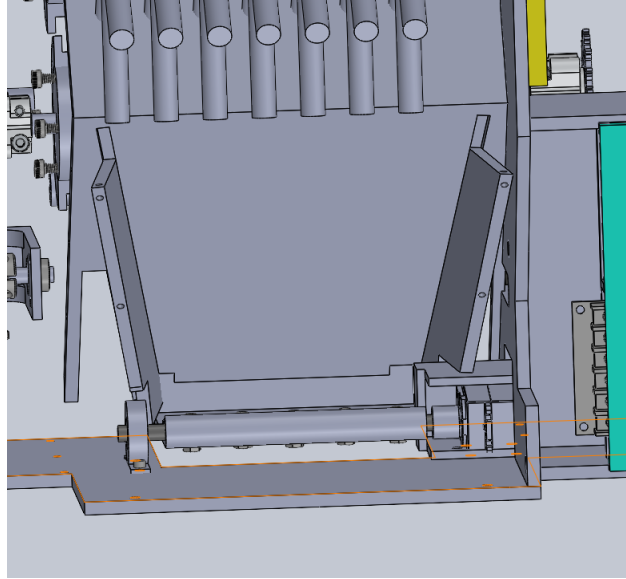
CAD zoomed into back of robot showing funnel structure and dumping door being placed inside of the robot for protection.
